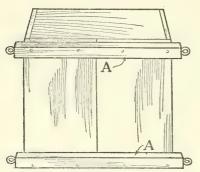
The Box Bottom showing Hanger Crosspieces
